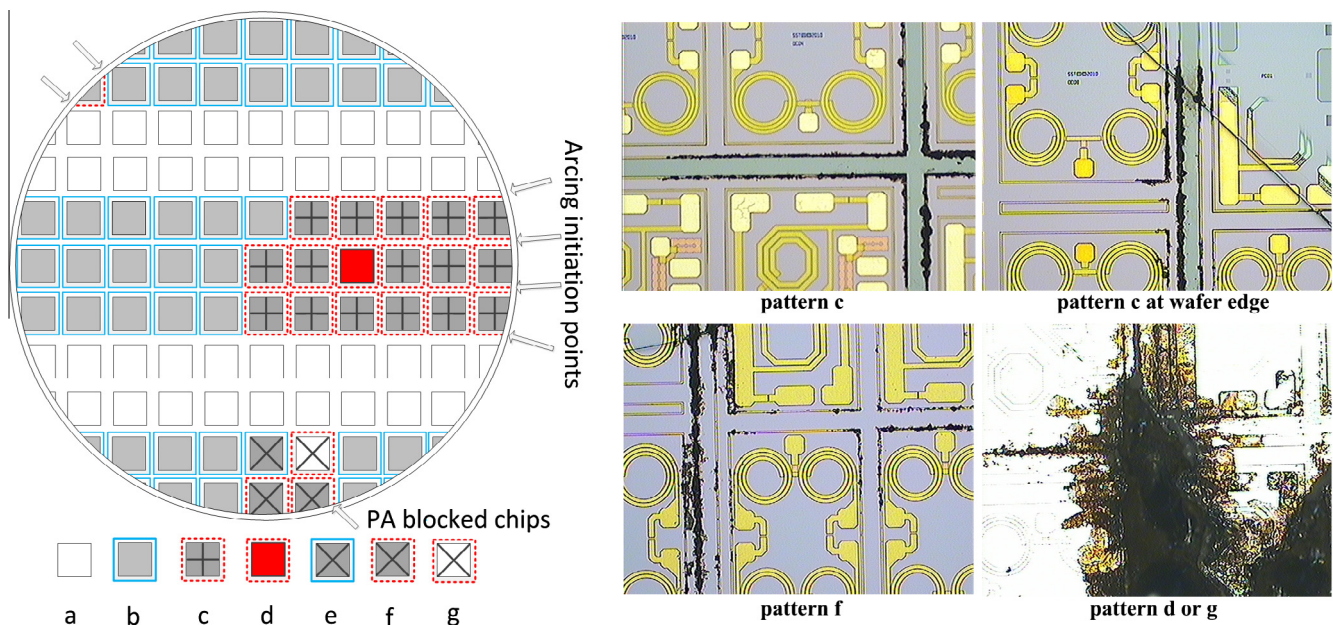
Arcing footprints and images of the IPD wafer: pattern a. chip without a seal ring; pattern b. chip with a seal ring; pattern c. chip with a burned out seal ring; pattern d. chip with a burned out seal ring and extensive arcing; pattern e. chip with PA etching blocked; pattern f. chip with PA etching blocked and with a burned out seal ring; pattern g. chip with PA etching blocked and with a burned out seal ring and extensive arcing. Images showing the typical effects of arcing on patterns c, f, d, and g are shown on the right.
